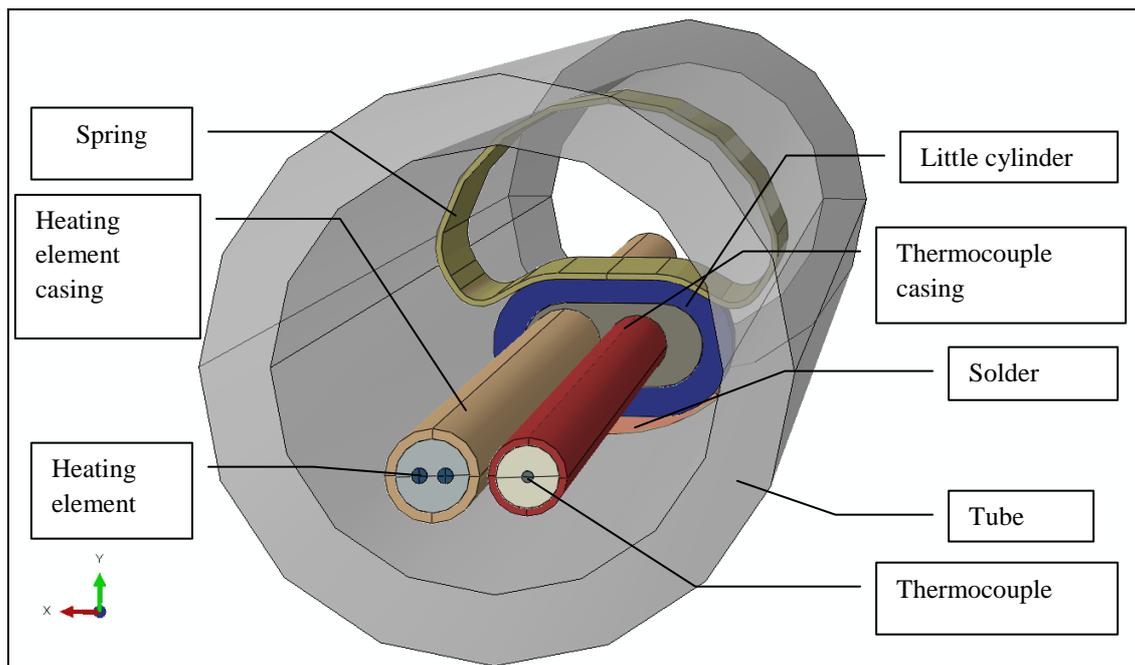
Geometrical and material model of one measuring point (HTC 1) inside the KNI-LM assembly
